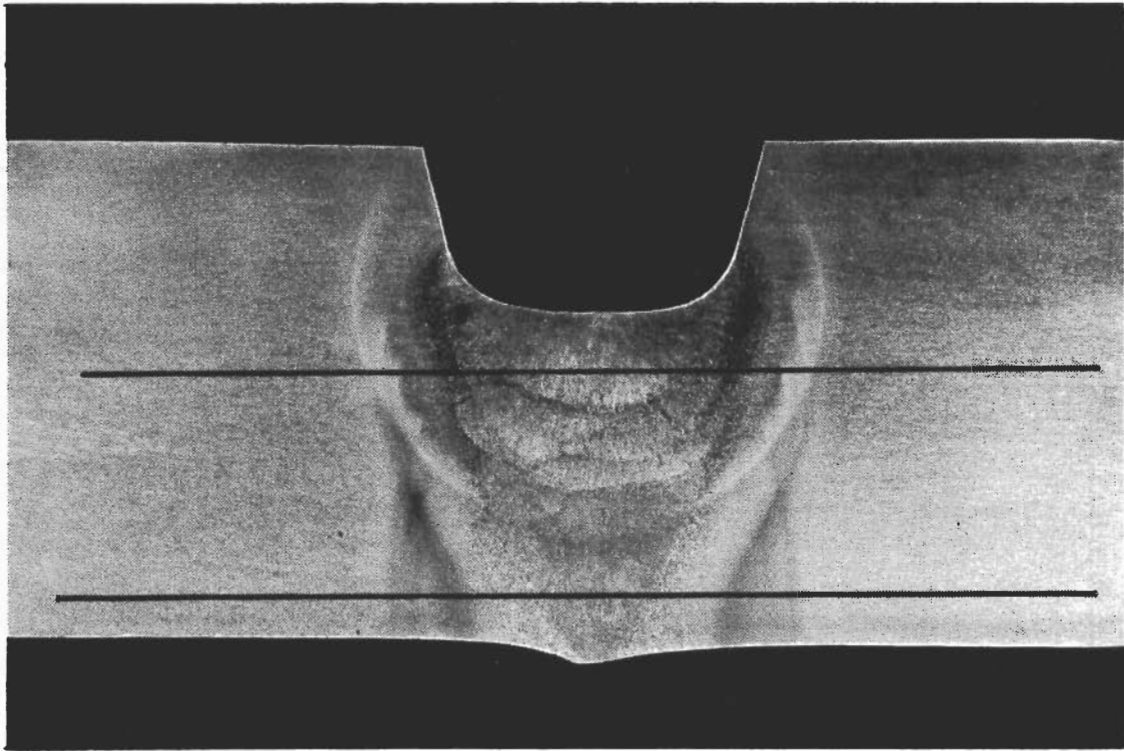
Typical Results of Microhardness Evaluations of Grade 250, 1/2-In.-Thick, 18% Maraging Steel Plate Weldments Using TIG Process, Welded With Five Weld Passes and Aged at 900°F for 8 Hours, Heat 120D163, Filler Wire 7C-093
